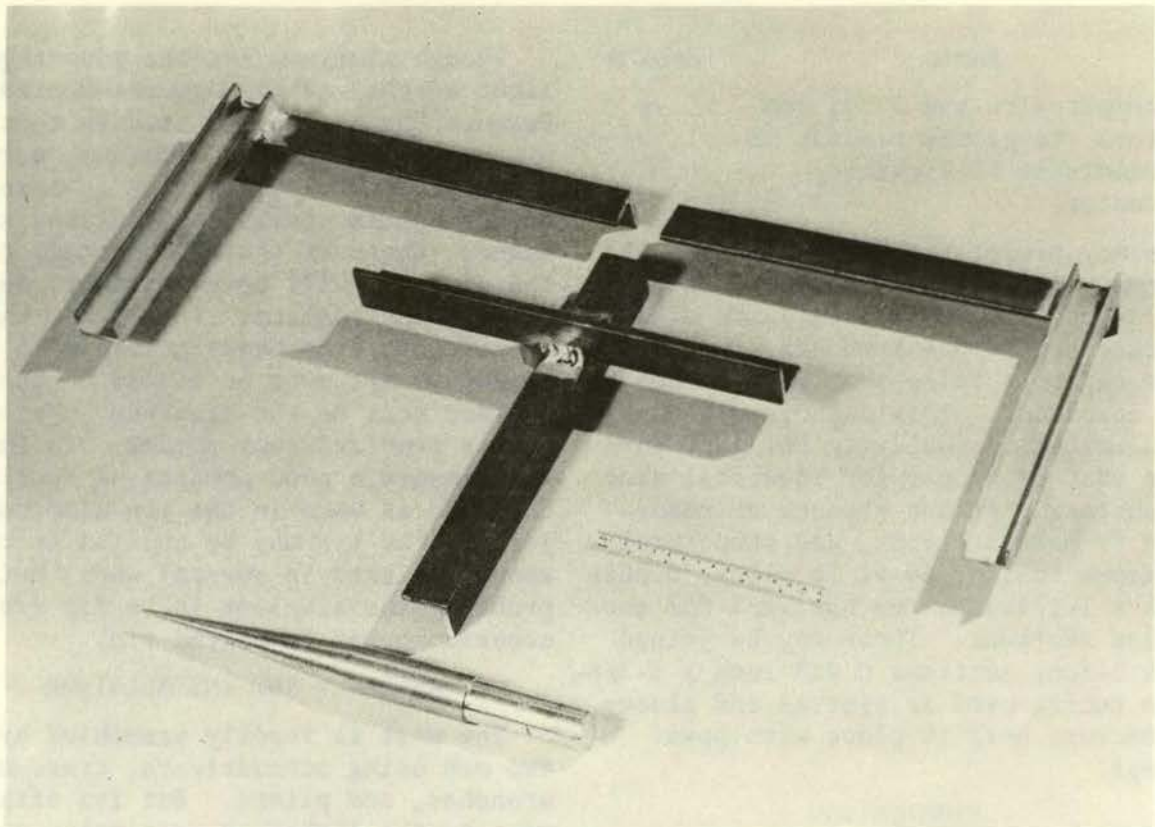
Fabricated aluminum parts--lightning rod, crossarm support, and two instrument mounts. Rod point should be 45°.
